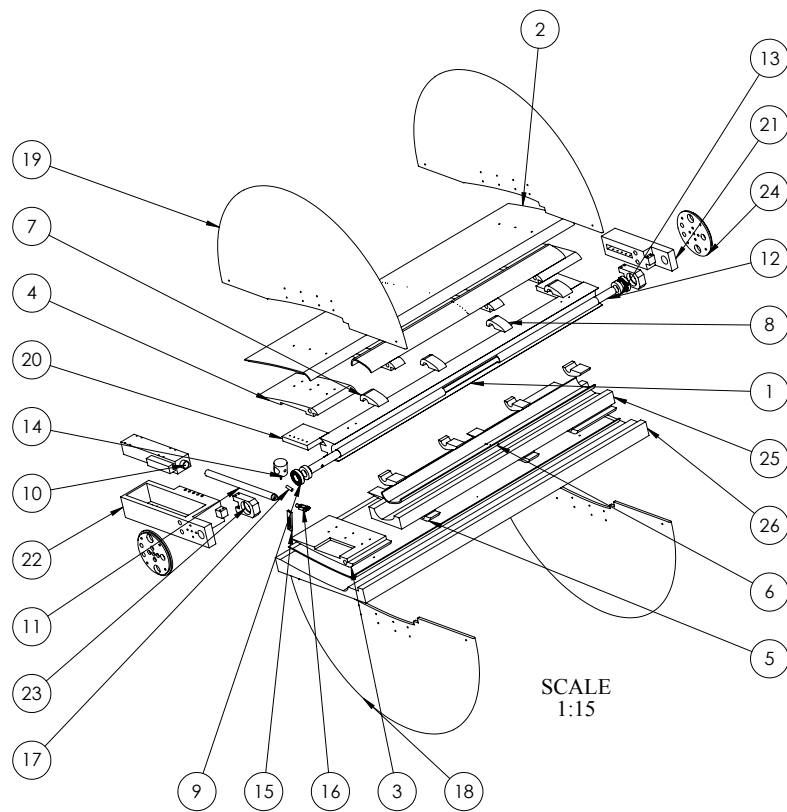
Exploded view visualising all parts featured in the leading-edge flap model.
